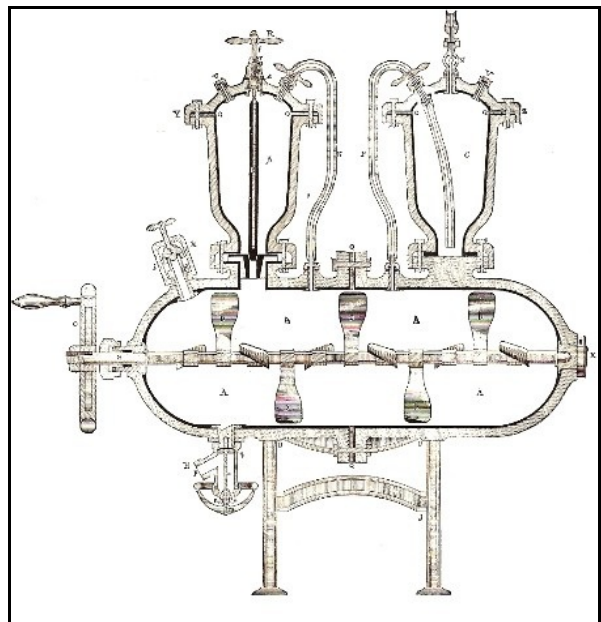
Tufts carbonator – cutaway drawing (Fowler 2013)
